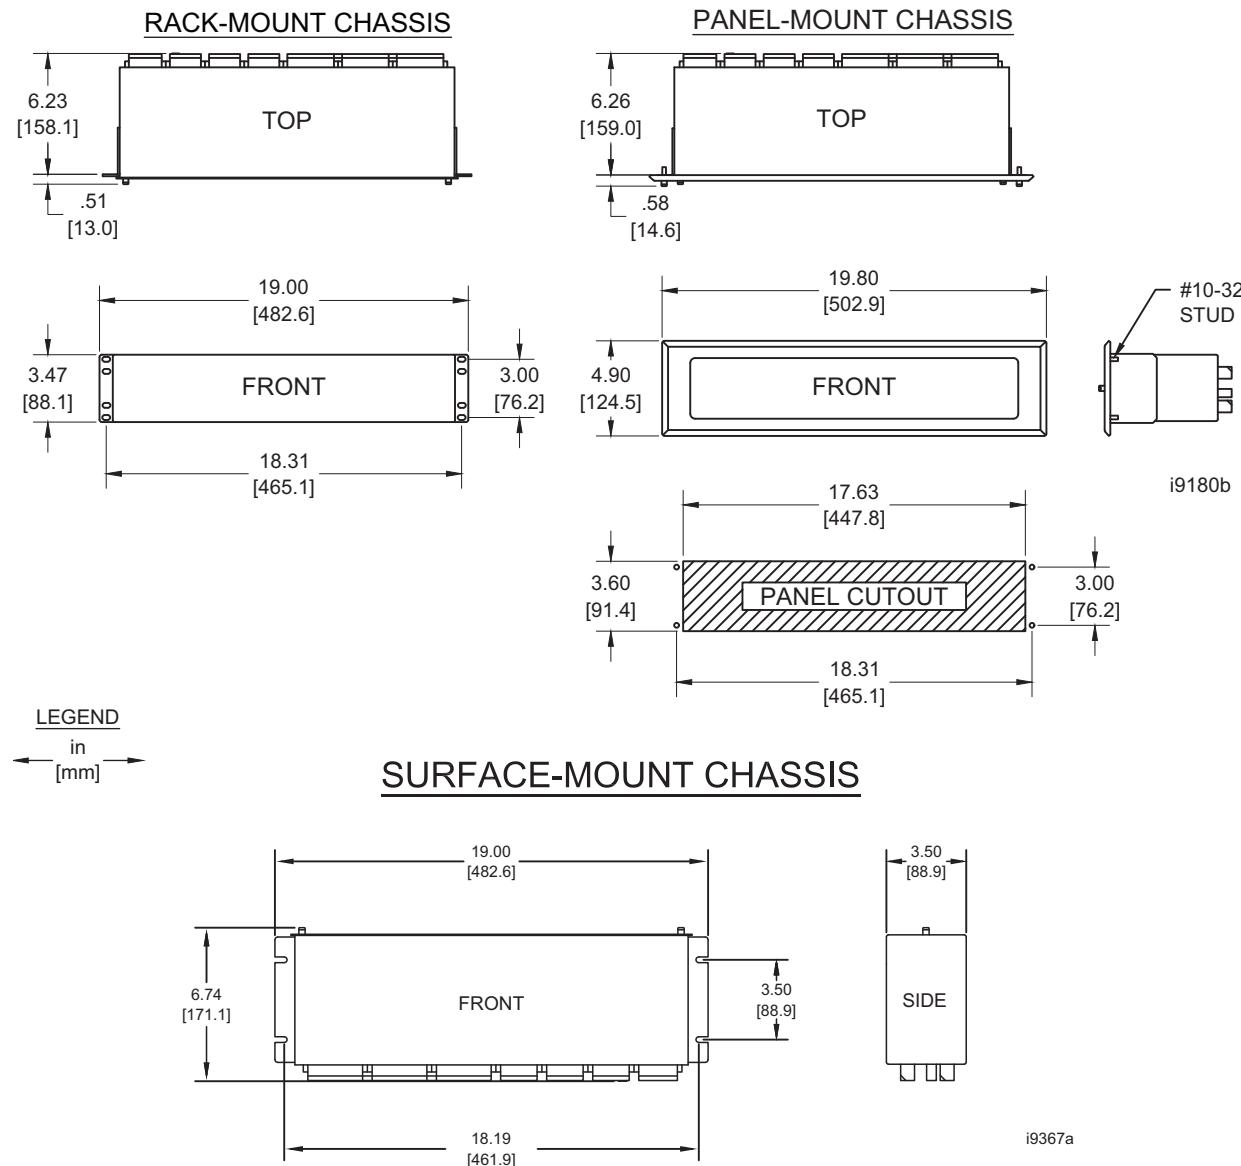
Rack-, Panel-, and Surface-Mount Dimensions
